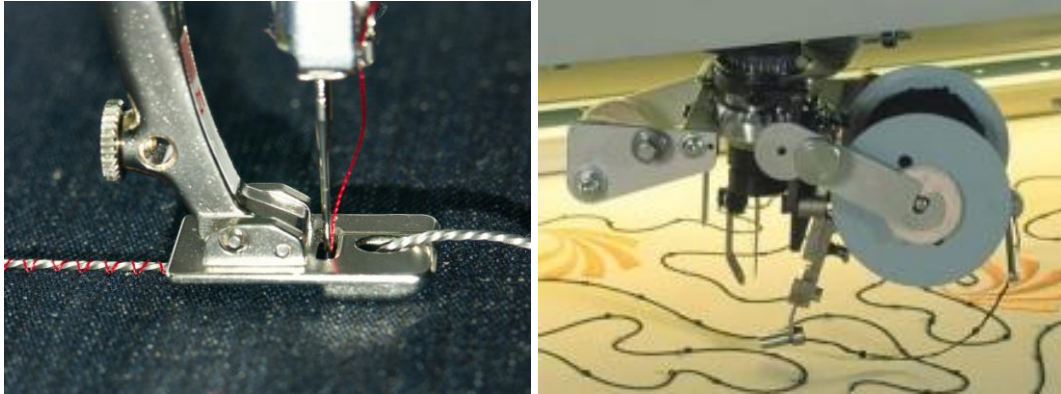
Left: A braiding foot in a home sewing machine. The hole guides the steel cord and the needle fixes it with a zigzag stitch. Right: The rotatable W-head in a professional embroidery machine assures that the direction of the laid yarn is always identical with the direction of the embroidery (Source: [26]).
